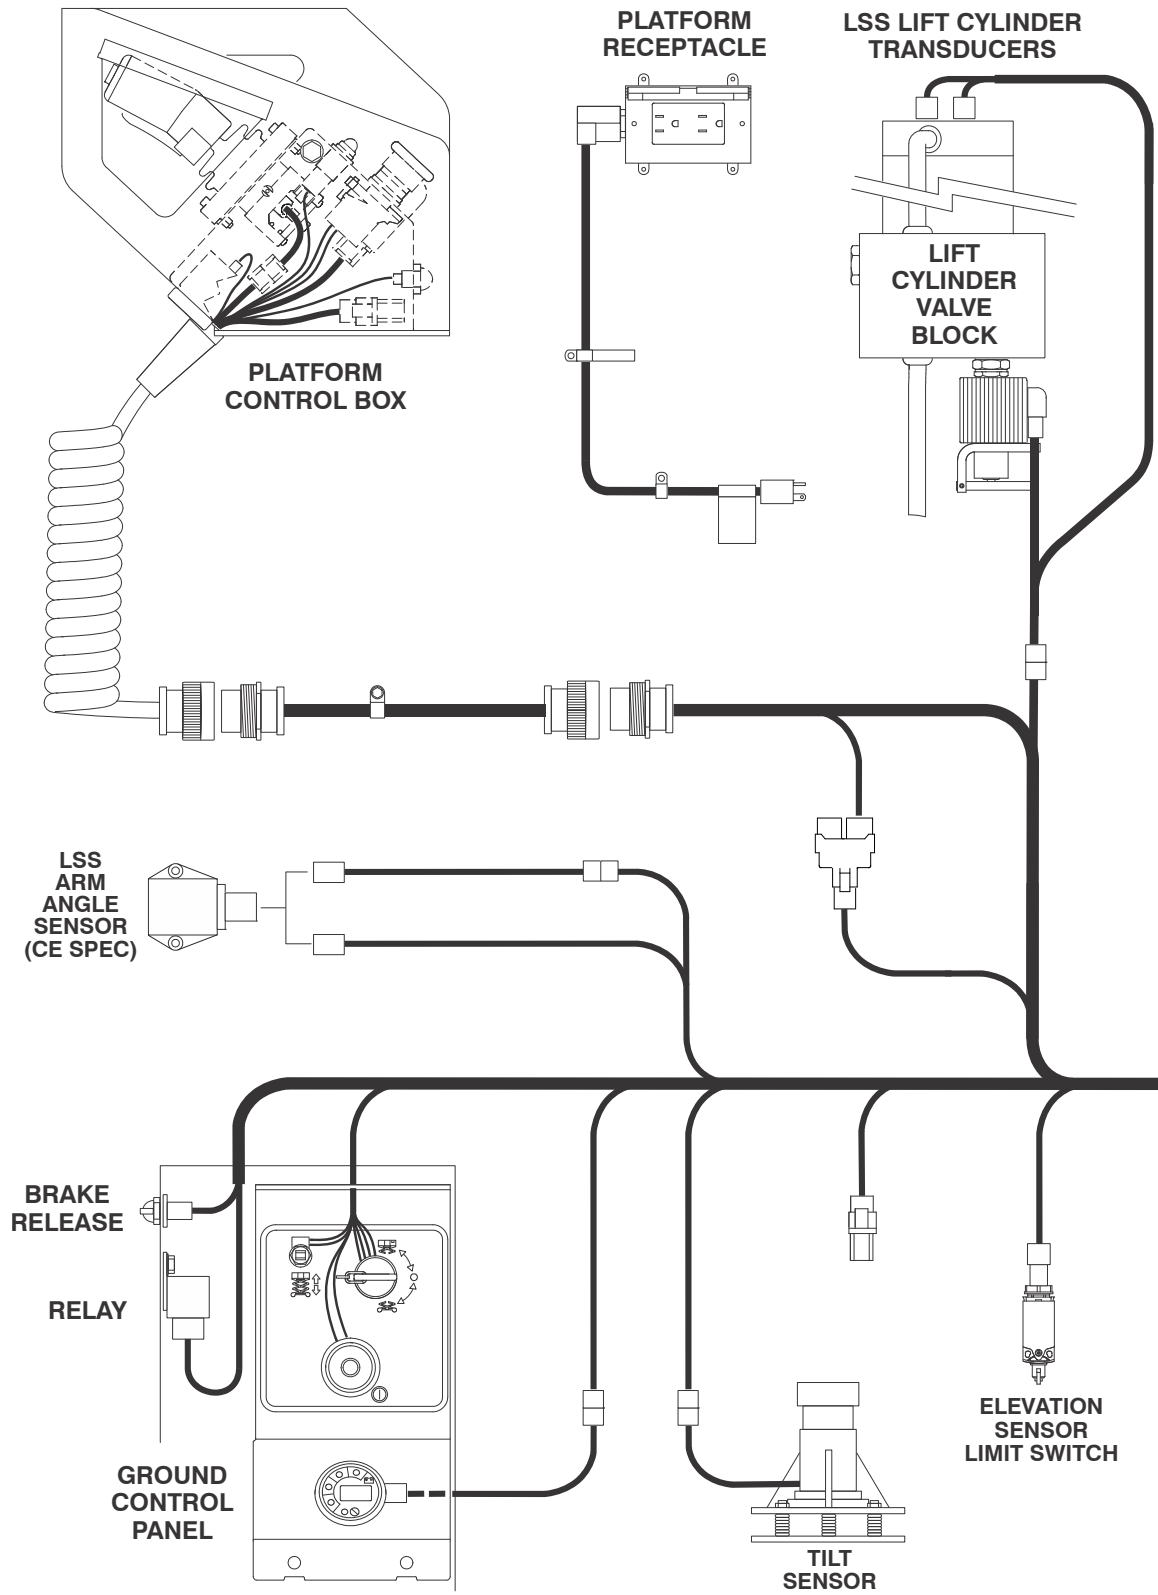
Electrical Components Layout - Sheet 1 of 2
